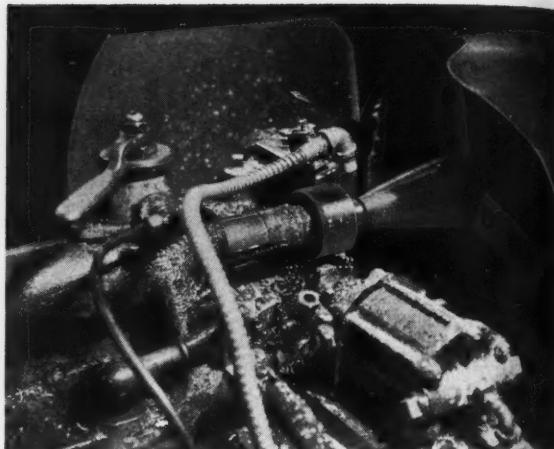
In This Operation the Nose is Bored and Tapped for the Fuze Adapter
